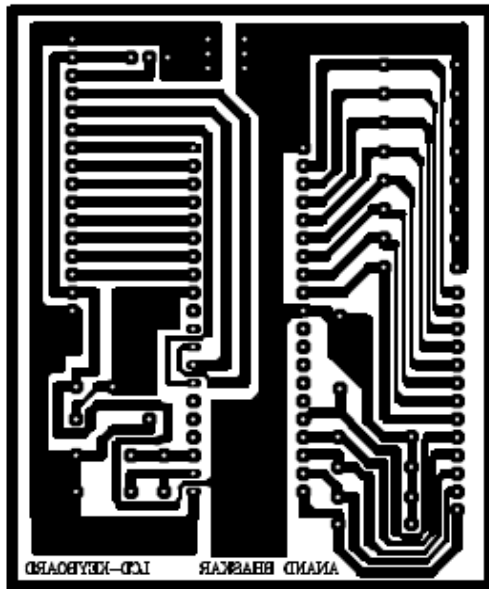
Actual size single side PCB for the keyboard interface with AT89C51 microcontroller.
